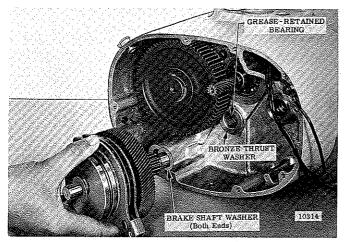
Removing Load Brake and Clutch Assembly (1/4 & 1/2 Ton Hoists)
